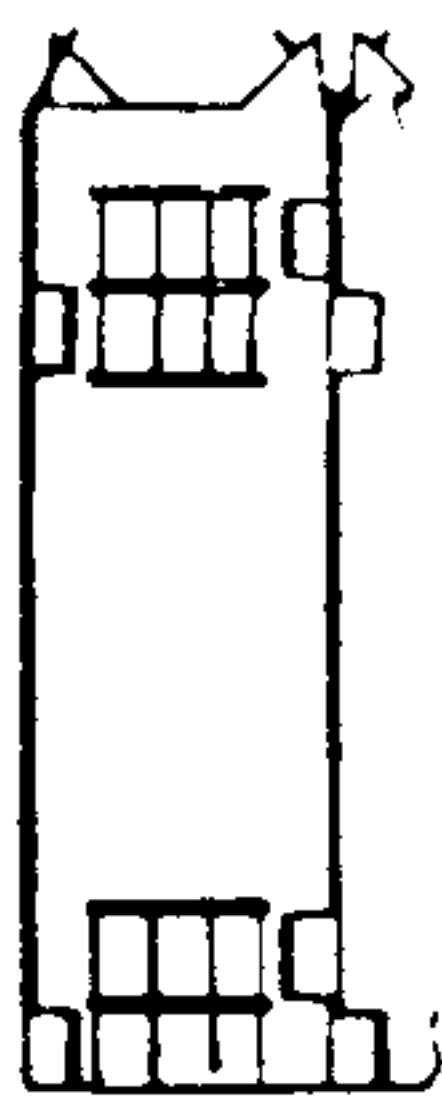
1x1 Type of Spacer Grid for X1 Type of Fuel Assembly
